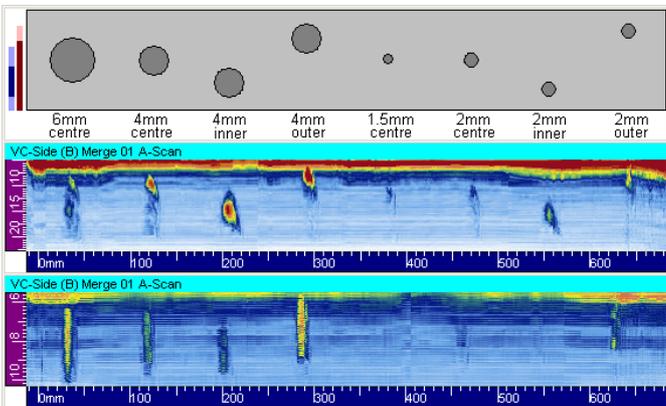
FLAT BOTTOM HOLES IN PIPE ENDS
